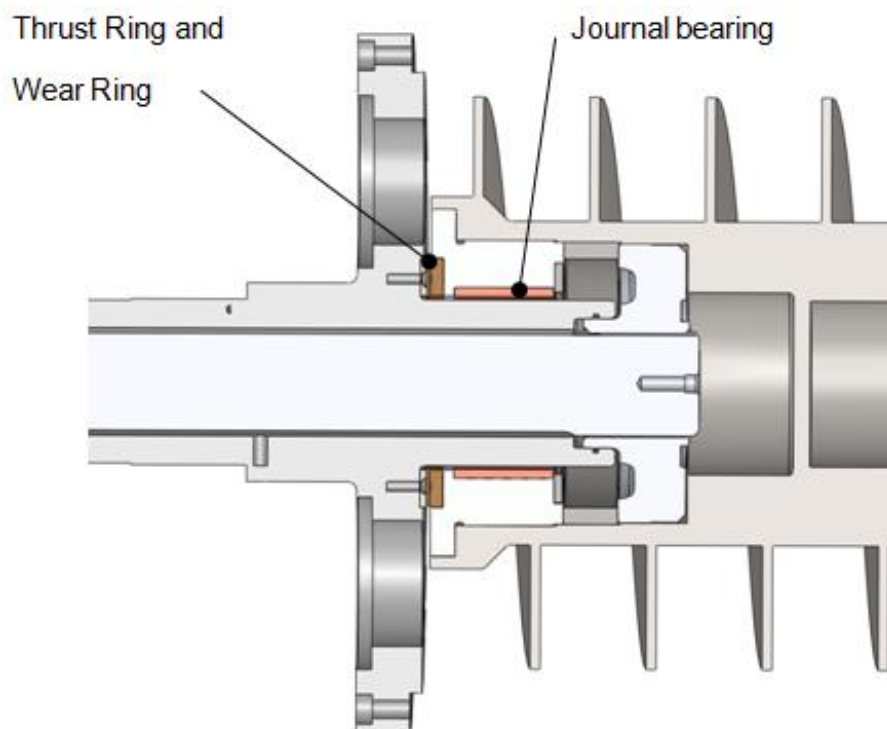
Modifications to conveyor liquid end to house fluid film bearings
